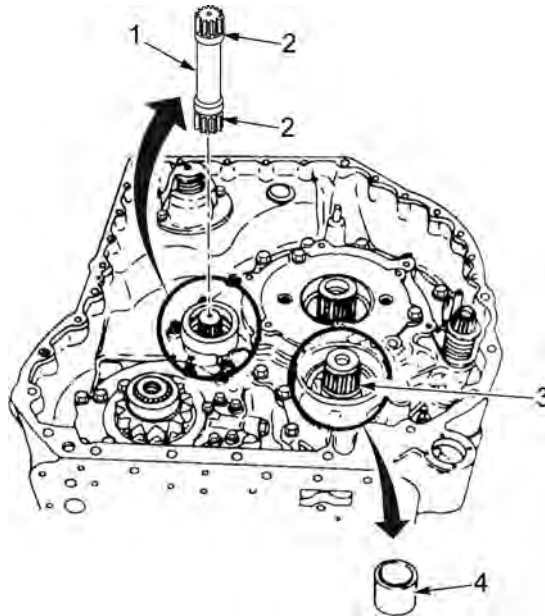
Inner (Left) Steer Shaft and Sleeve Removal.
